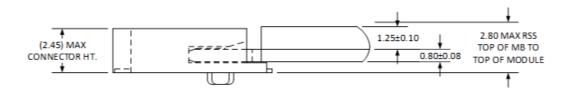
H2.5-S2 - Stack-up Top Mount Single-sided Module for 1.35 Maximum Top-side Component Height and with Higher Clearance above Motherboard
